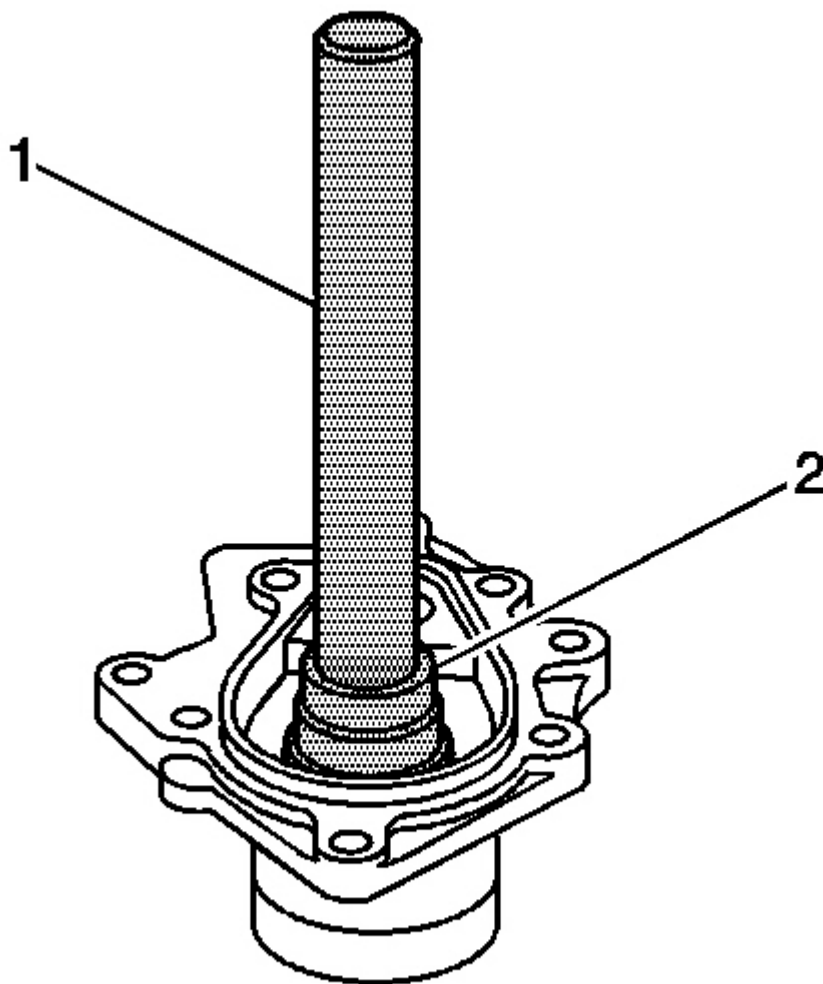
Universal Driver Handle And Differential Bearing Adjuster Needle Bearing Replacer - LH (Outer Case Half)
